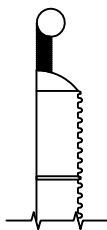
HEADER WITH REDUCING STUB TO BOTTOM INTO END CAP.
